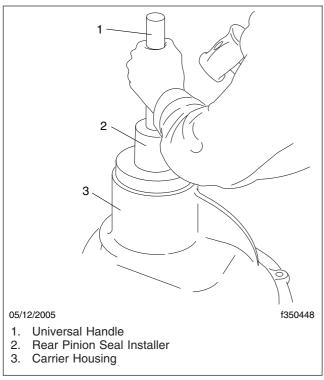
, Installing the Rear Pinion Seal, Model 4 Axle
